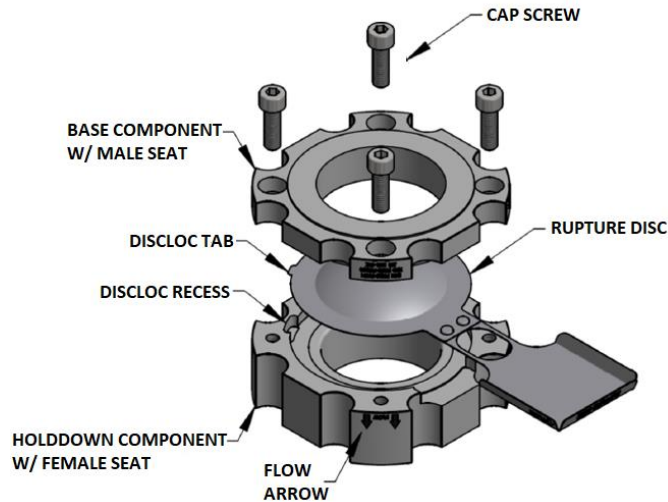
Pretorqueable Holder (TQ+/TQ(+)) Full Torque Configuration Shown)
